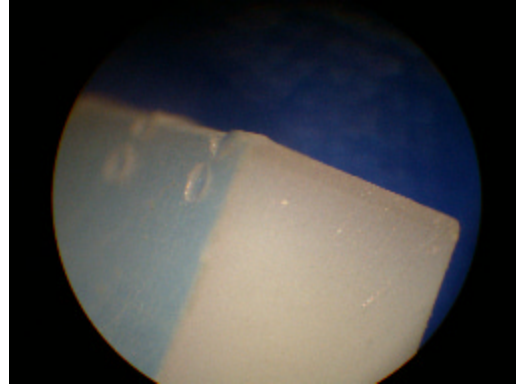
D. 36x Somos 8110 Dimples and fracture surface
